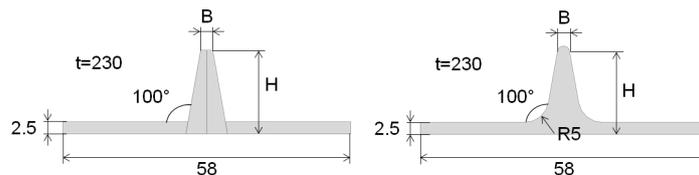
Definition of trapezoidal and drop rib specimen (measurements in mm).
